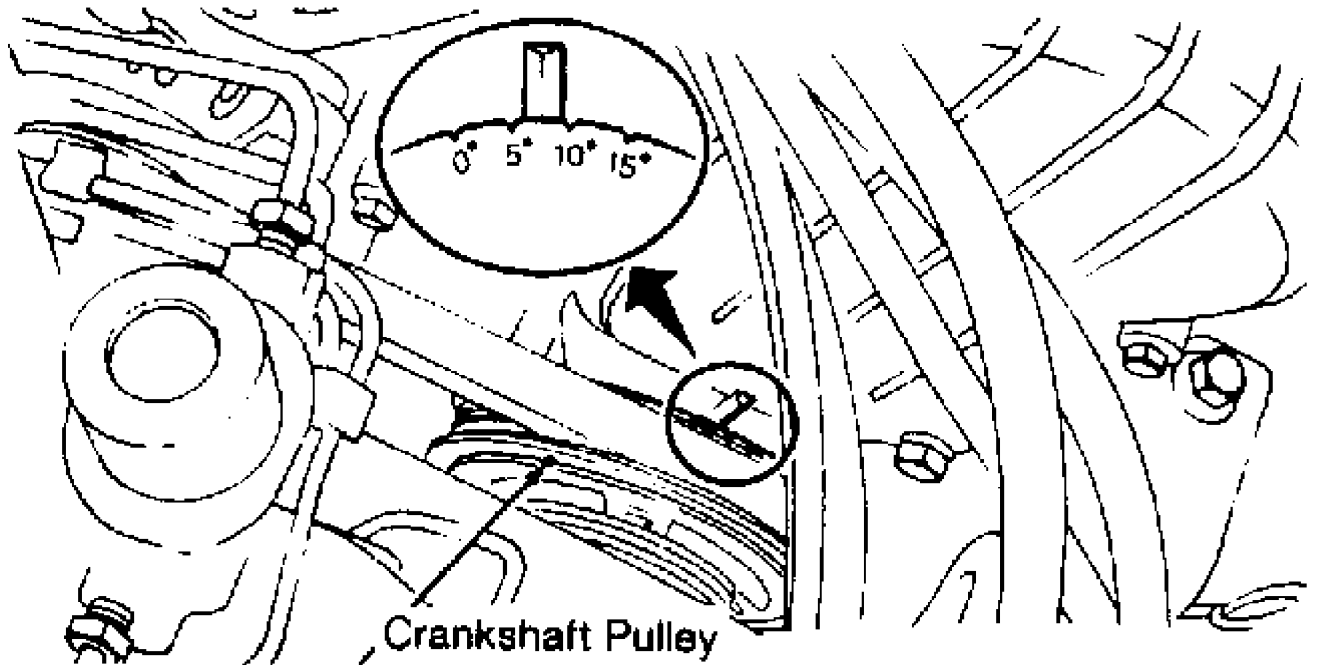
Locating Ignition Timing Mark - 3-Cylinder
